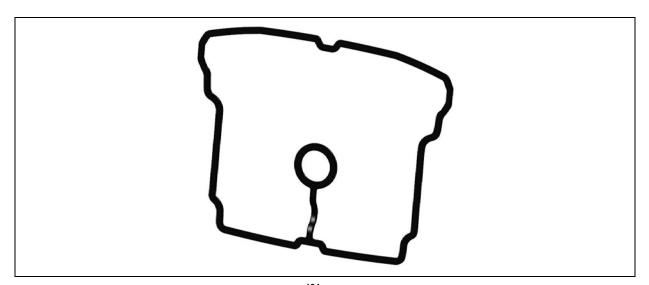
Cylinder Head Cover Gasket (XY150)¹⁹⁴
